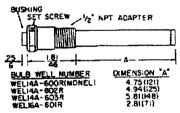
Buib well for liquid immersion applications where a temperature buib may be removed without draining tank.
